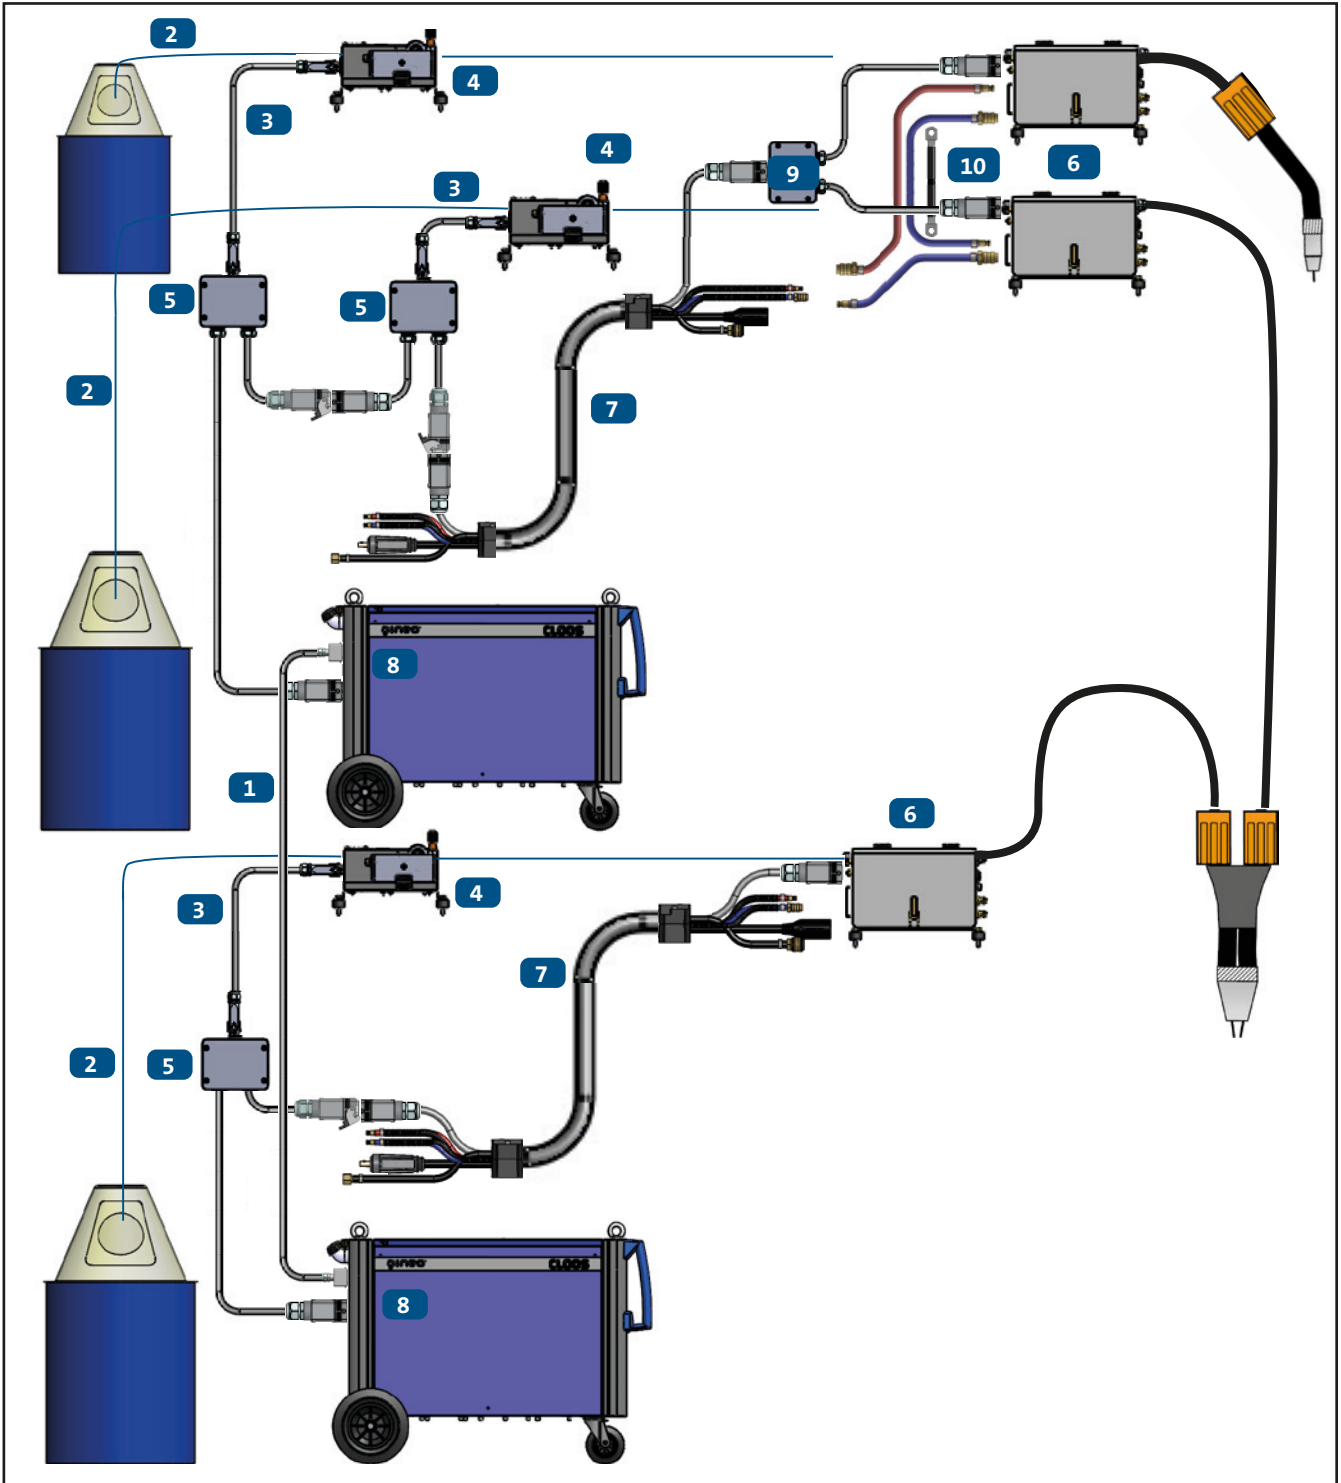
Connection diagram for the Tandem welding process including single wire torch
